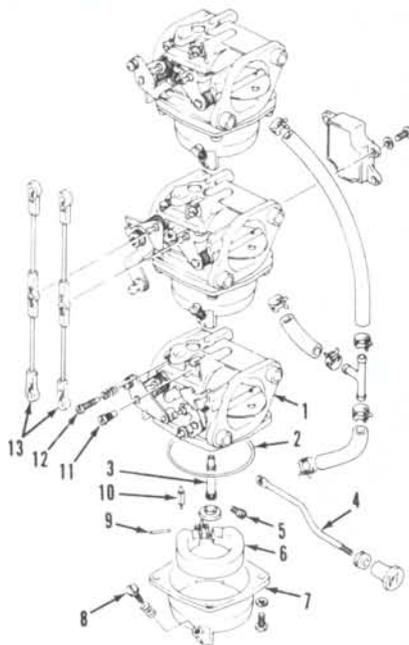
Exploded view of Mikuni B26-20 carburetors used.
